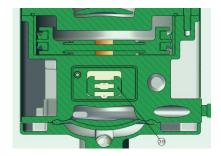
Position of the ceramic plate and the pneumatic valve block
